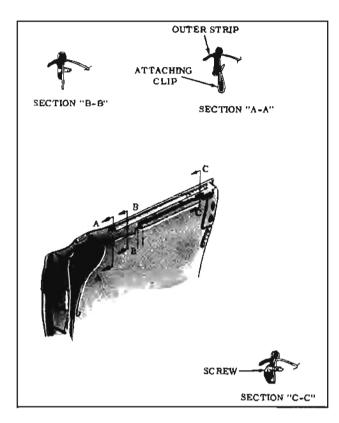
Run Channel Outer Strip without a Belt Reveal Molding
